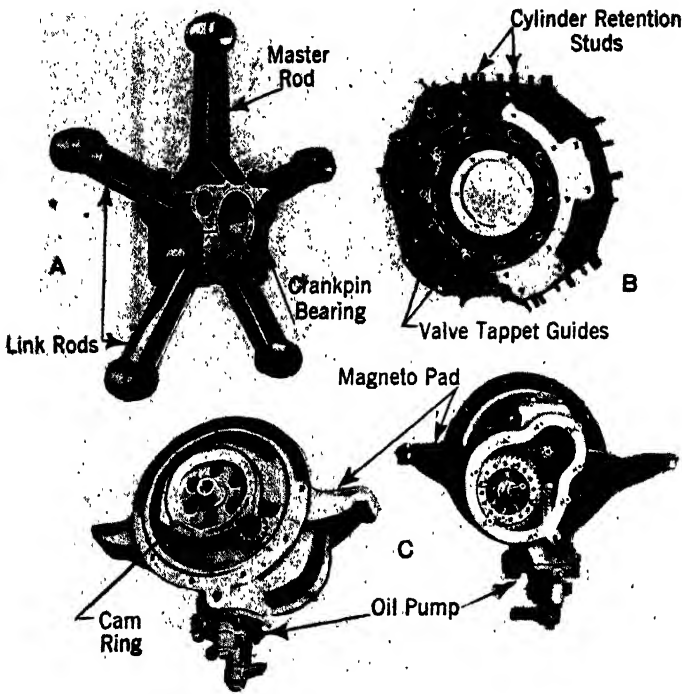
Important Parts of Detroit Aircraft Engine. A—Connecting Rod Assembly, Note Substantial Master Rod. B—Front View of Crankcase Showing Valve Tappet Guides. C—Showing Cam Ring and Oil Pump. Drive Group.
